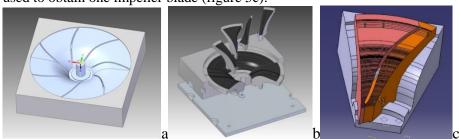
a) 7 blade negative impeller; b) CAD animation blade extraction; c) configuration of segment and spacer used to manfacture one blade
